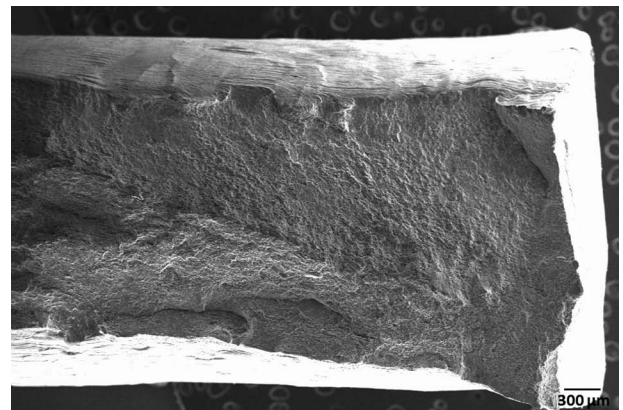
Fracture surface of a room temperature tensile-tested specimen of aluminum alloy AA 6351-T6511 taken at low magnification
